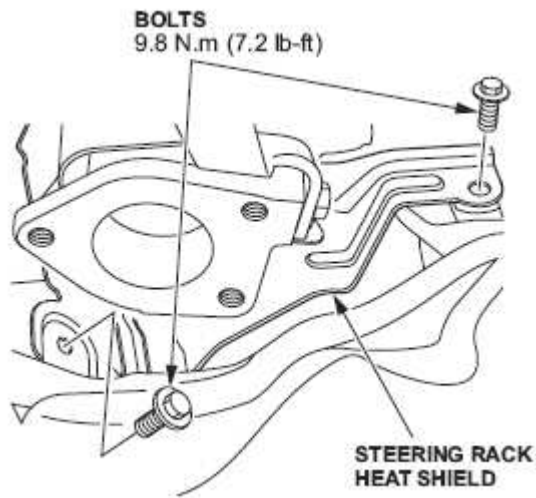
Identifying Steering Rack Heat Shield With Bolts & Torque Specifications
